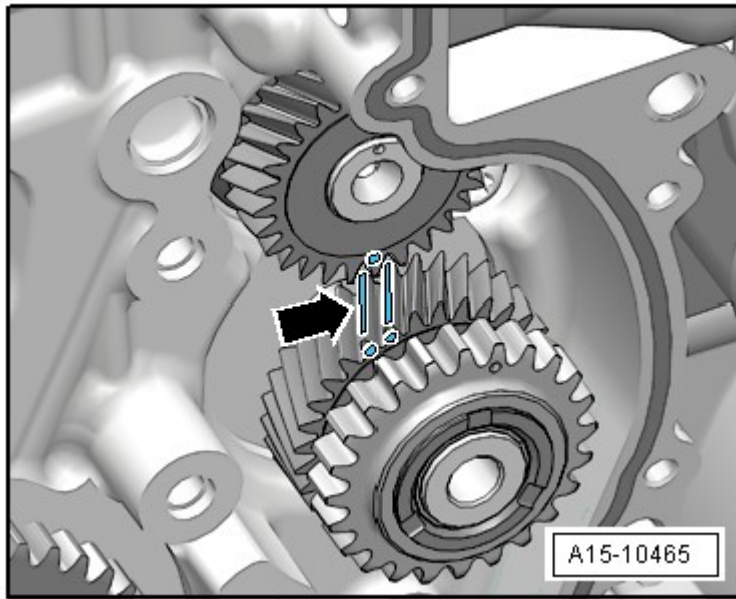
Identifying Bearing Pins, Installation Position
